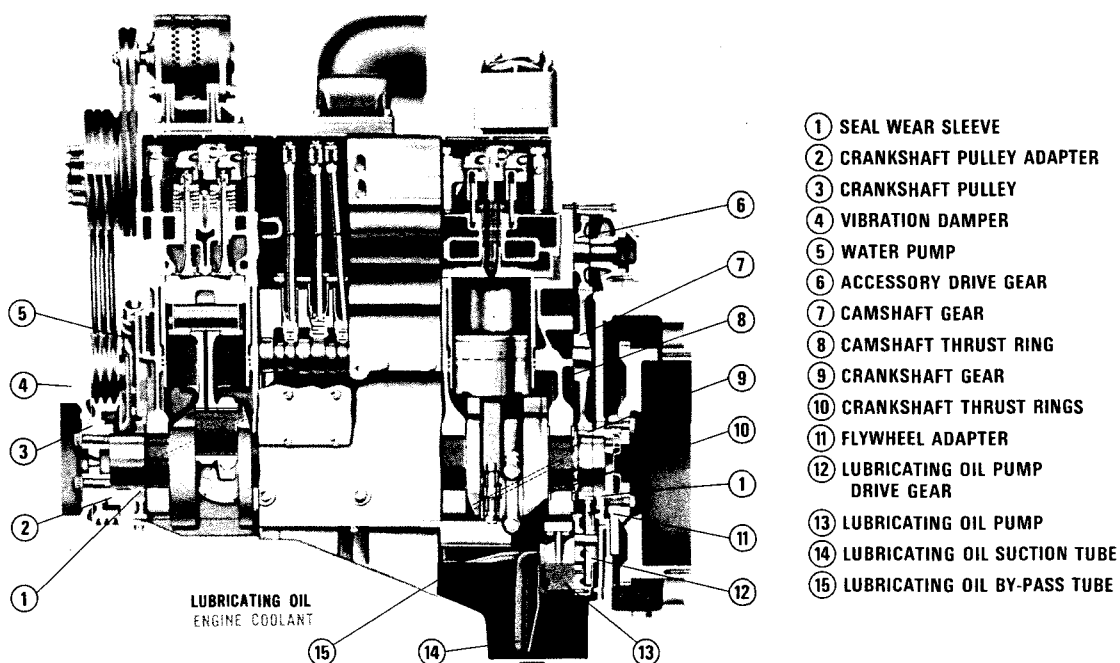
, (LWC-16). Lubricating oil and coolant flow — V-903 Series Engines
